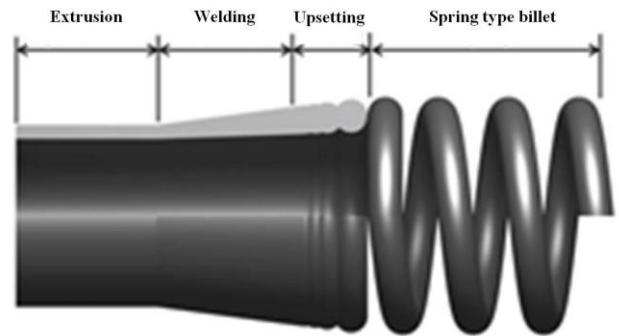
Shape of plasticity flow of wire material in welding concurrent extrusion forming die assembly
